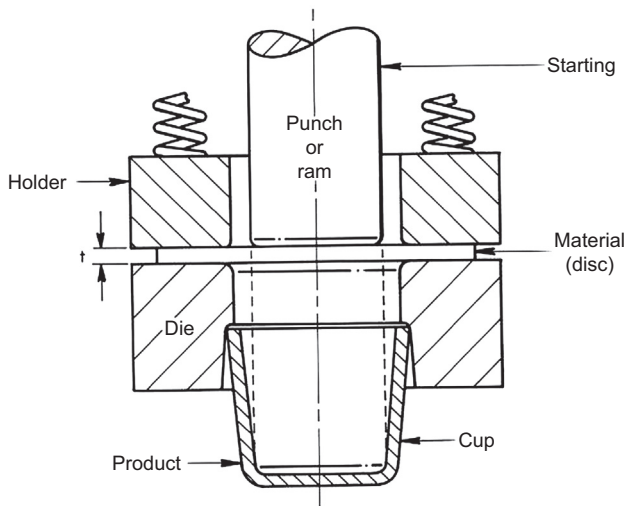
Deep drawing of metallic sheet schematic of tooling – typical.
